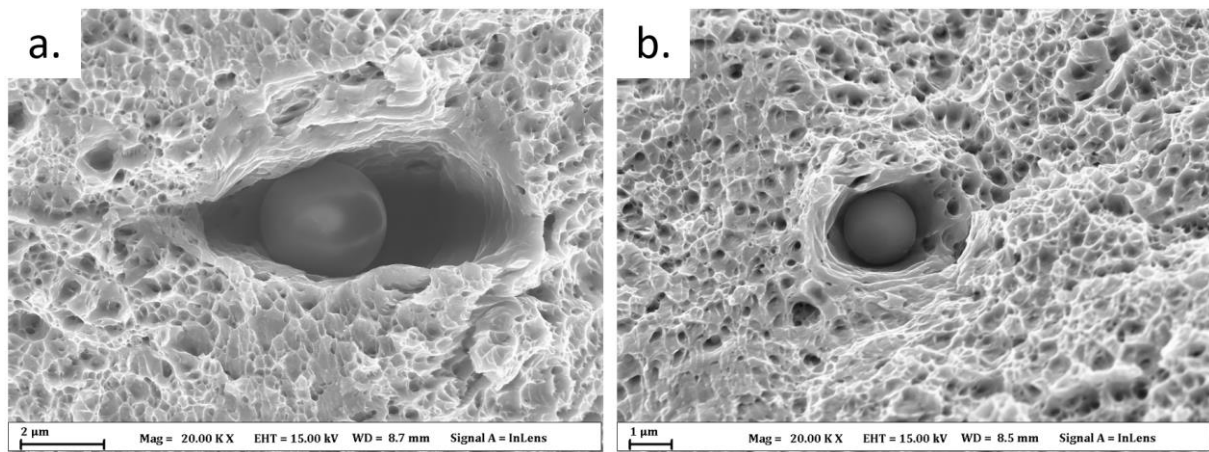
Examples of spherical oxides rich in Cr, Mn and with some traces of Si, commonly observed on the fracture surfaces of 316L stainless steel processed in argon (a.) and nitrogen (b.).
